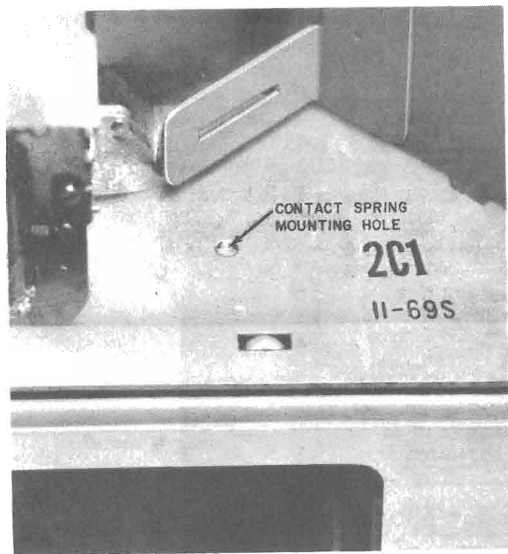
Location of Contact Spring Mounting Hole in 2A/2C Telephone Sets
